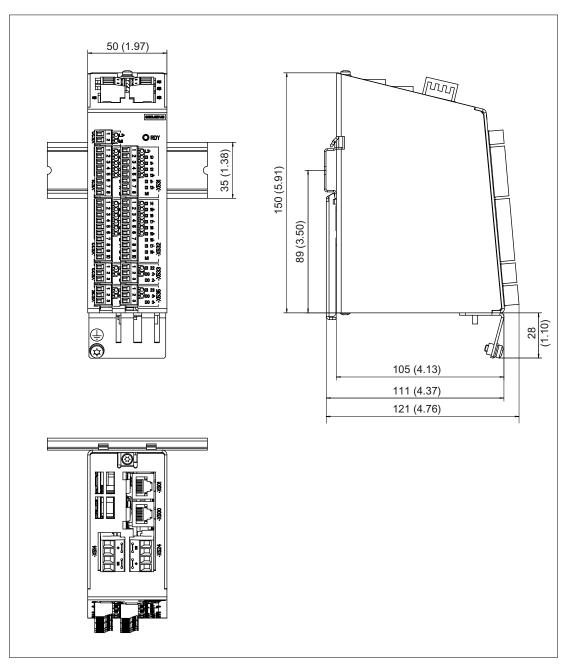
Dimension drawing of Terminal Module TM54F, all data in mm and (inches)
